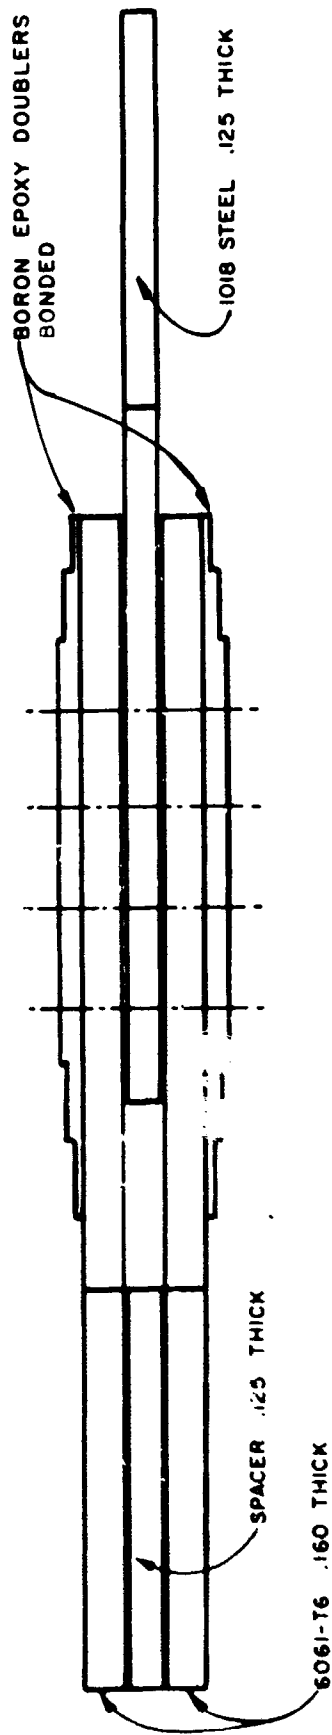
Drawing of Specimen with Loaded Holes, Four Hole Pattern
